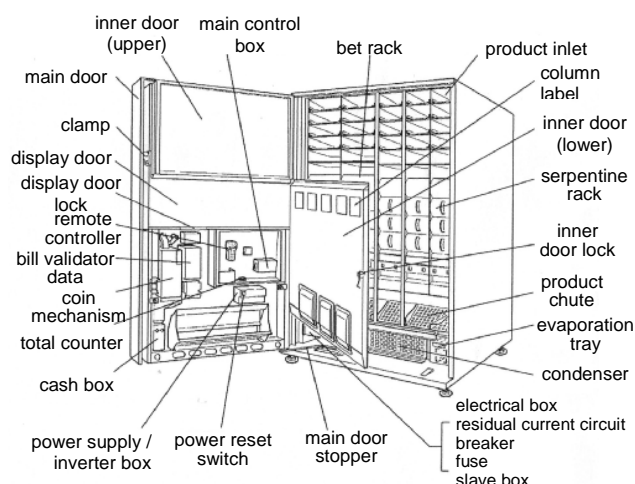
Interior of a Can or Bottle Vending Machine
